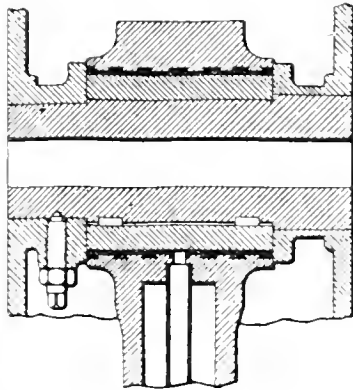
GUDGEON-PIN CONSTRUCTION FOR TOSI SUBMARINE DIESEL ENGINE
